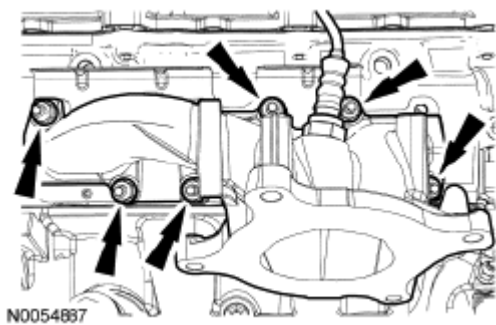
Locating Exhaust Manifold Gasket Nuts
